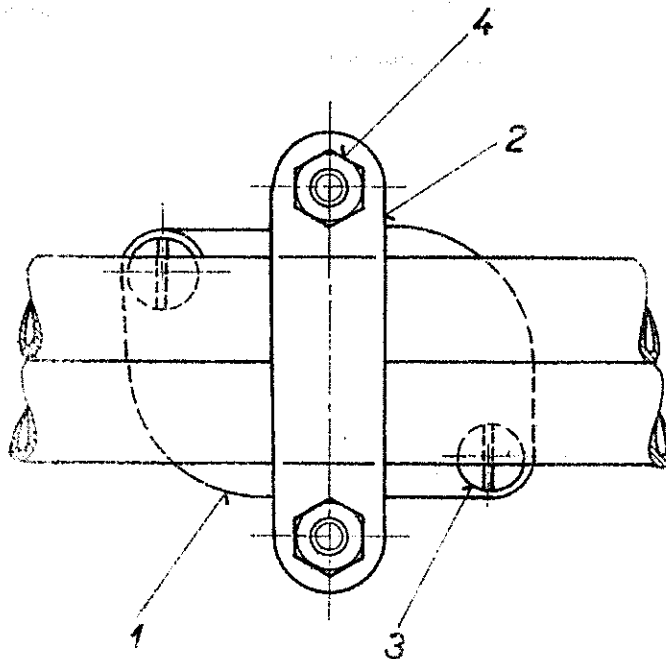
Bracket-fastening of the oil piping to the engine crankcase
